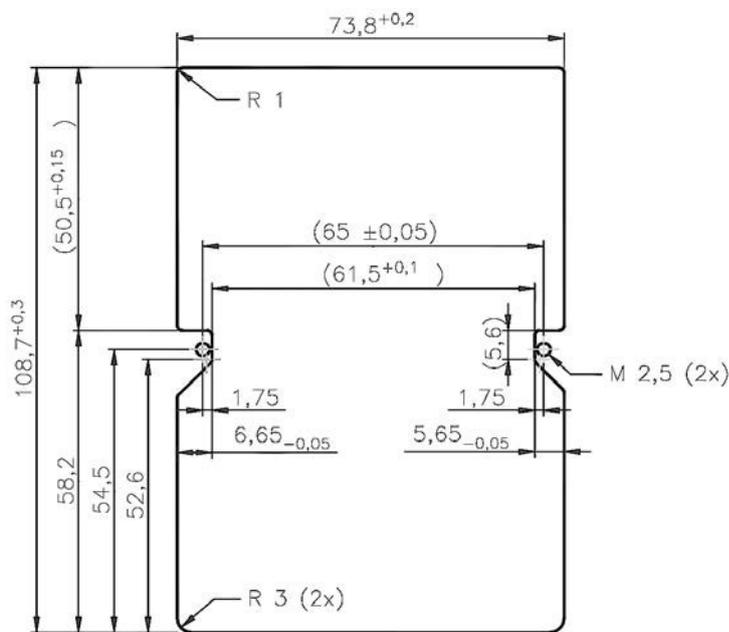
Dimensions front panel installation of GPT-4352-60 in mm
